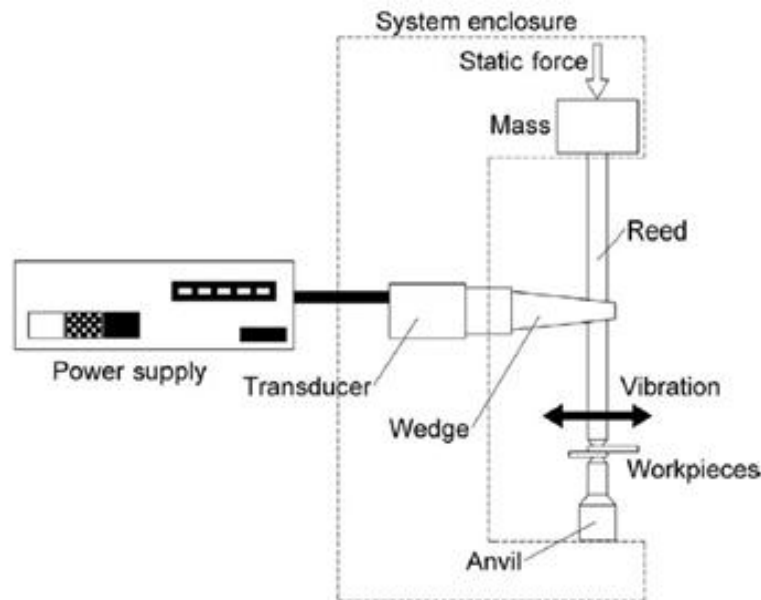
Wedge reed Ultrasonic Welder, (Source: EWI)
